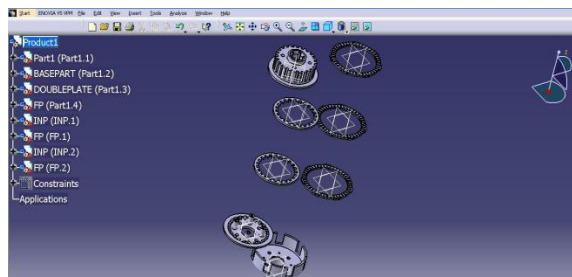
D representation of Exploded View of Wet Multi-plate Clutch.
